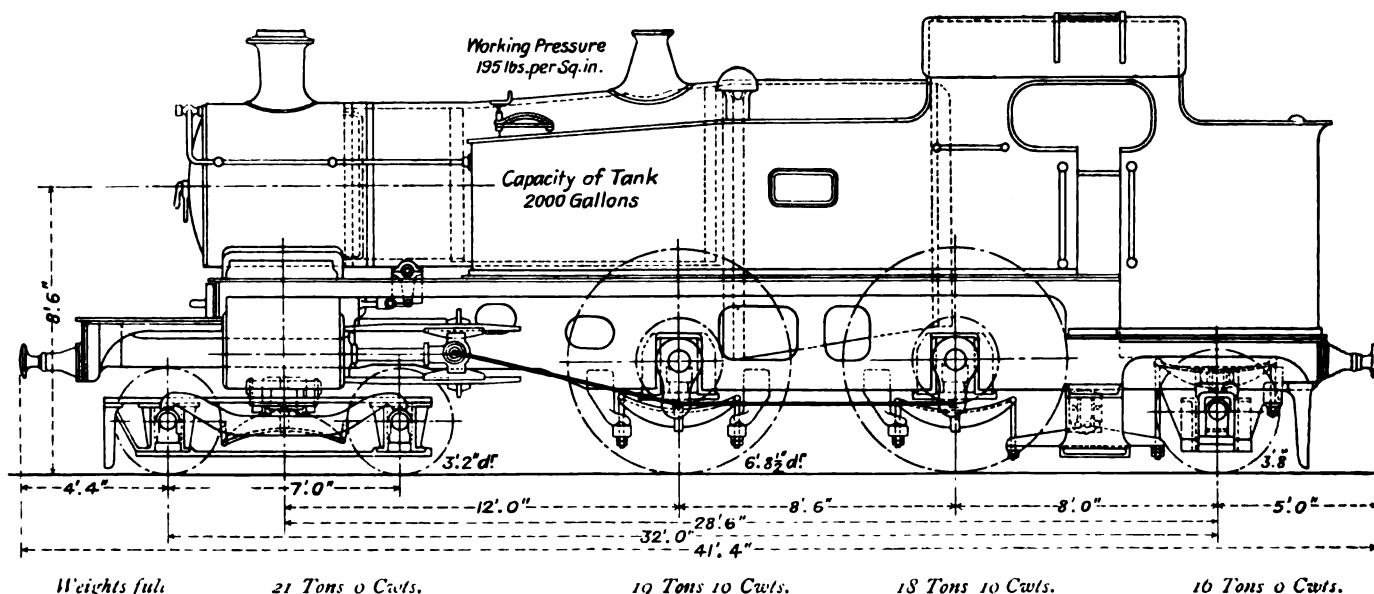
4-4-2 Type Passenger Tank Engine; Great Western Railway.
